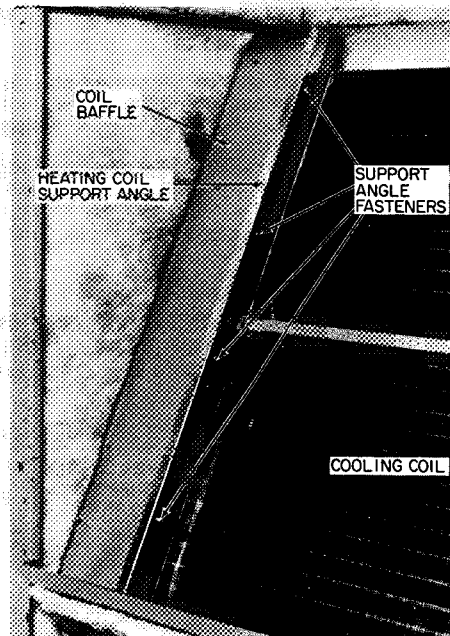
Left-Hand Coil Support Angle Mounted on Coil Baffle (Typical for 016 and 024 Sizes)
